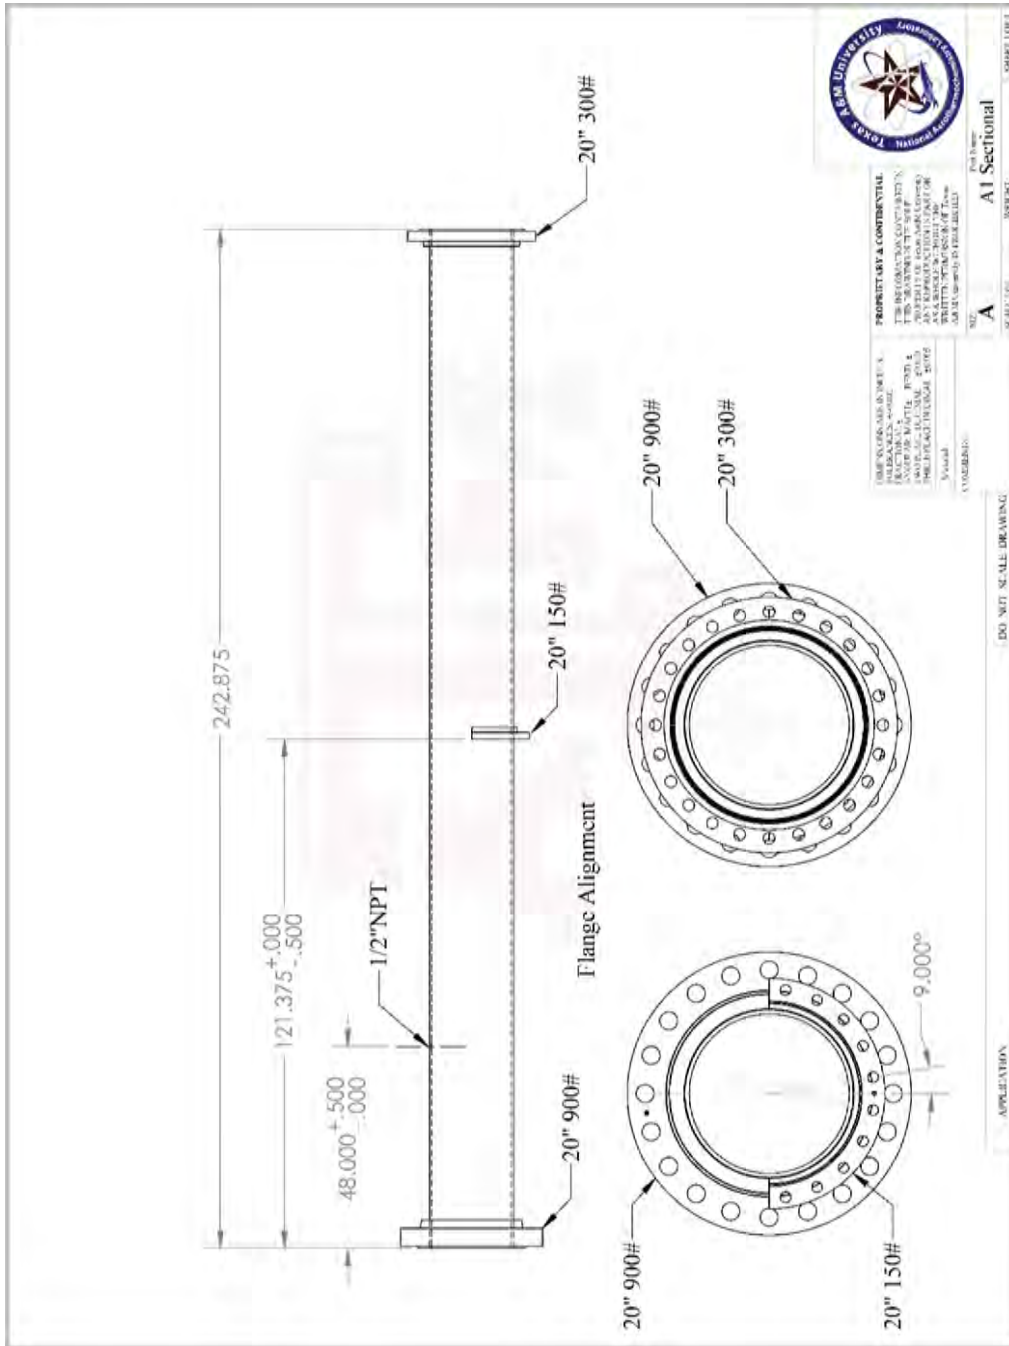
FIRST ACCELERATOR SECTION DRAWING SUBMITTED TO CIRCLE H MANUFACTURING FOR ASME CERTIFIED HIGH PRESSURE WELDING.
